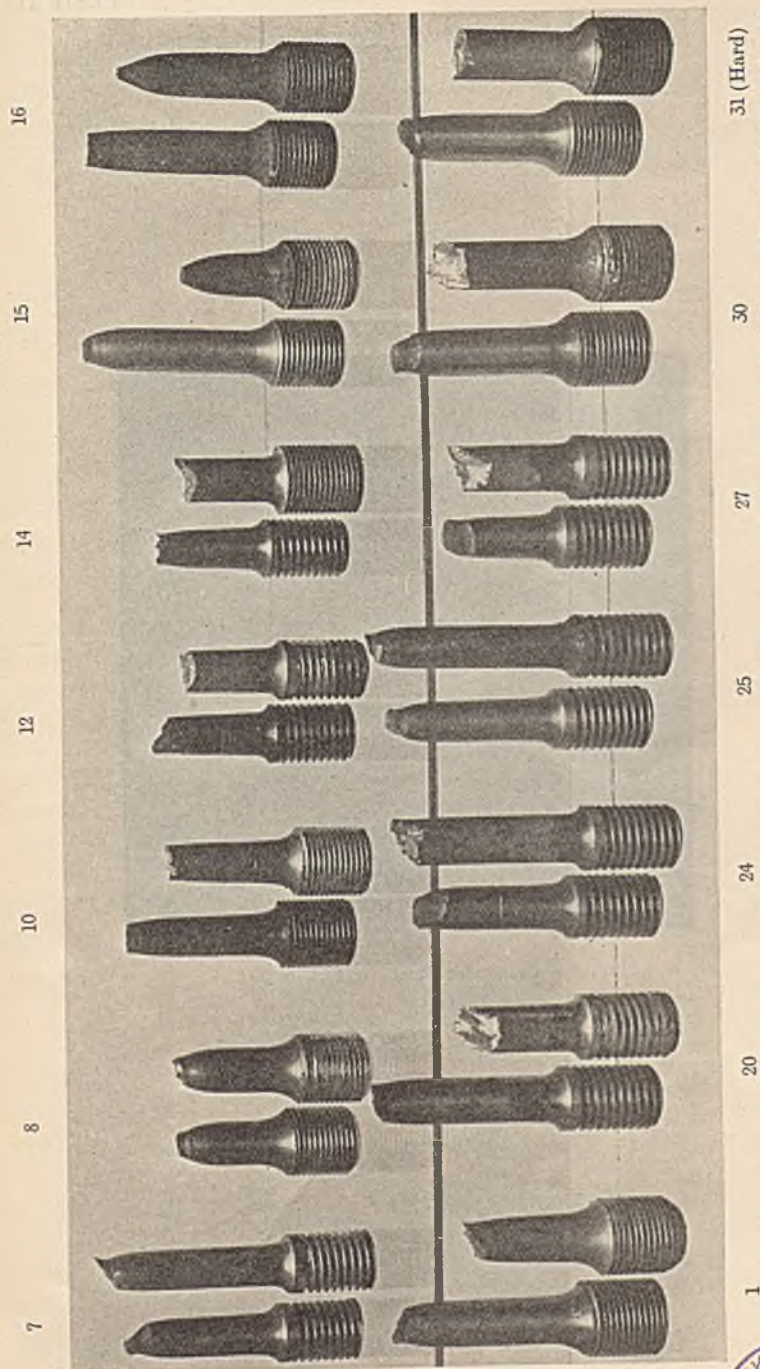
Representative Pairs of Broken Tensile Pieces Tested under Oil and Solder (Piece Tested under Solder to Right in Each Case).
